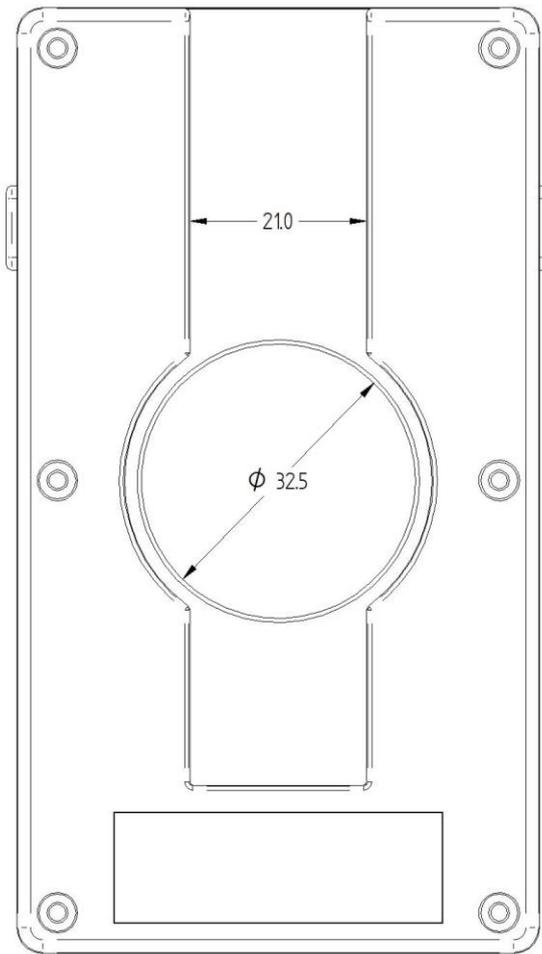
skID R1280I Technical Drawings – Back panel view
